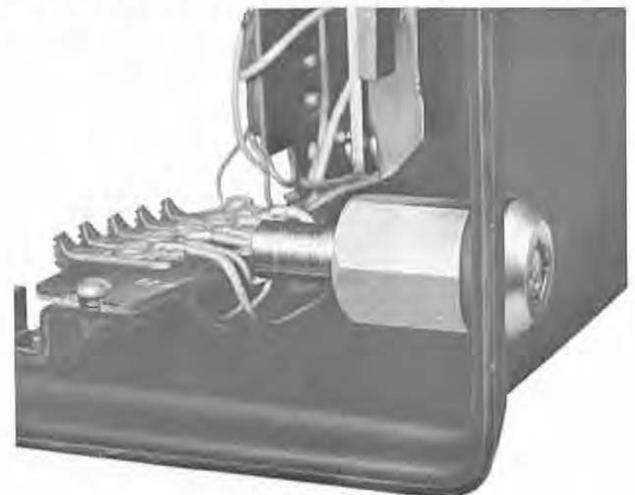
Cutaway Section of Upper Housing, KS-19277 Lock Assembly Installed
